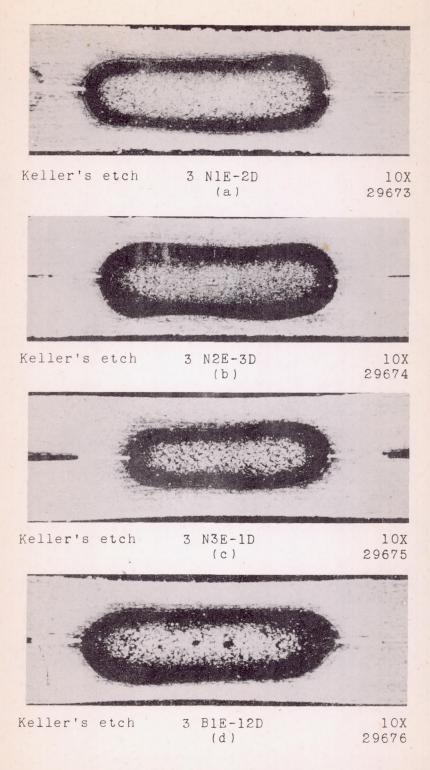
Representative welds from spot pattern specimens (0.064")
